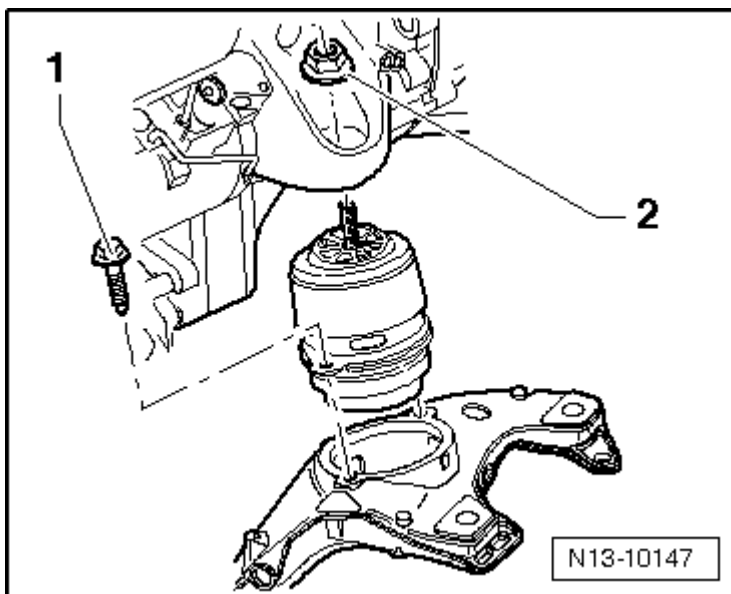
Identifying Nuts On Engine Mount At Left And Right Engine Supports
